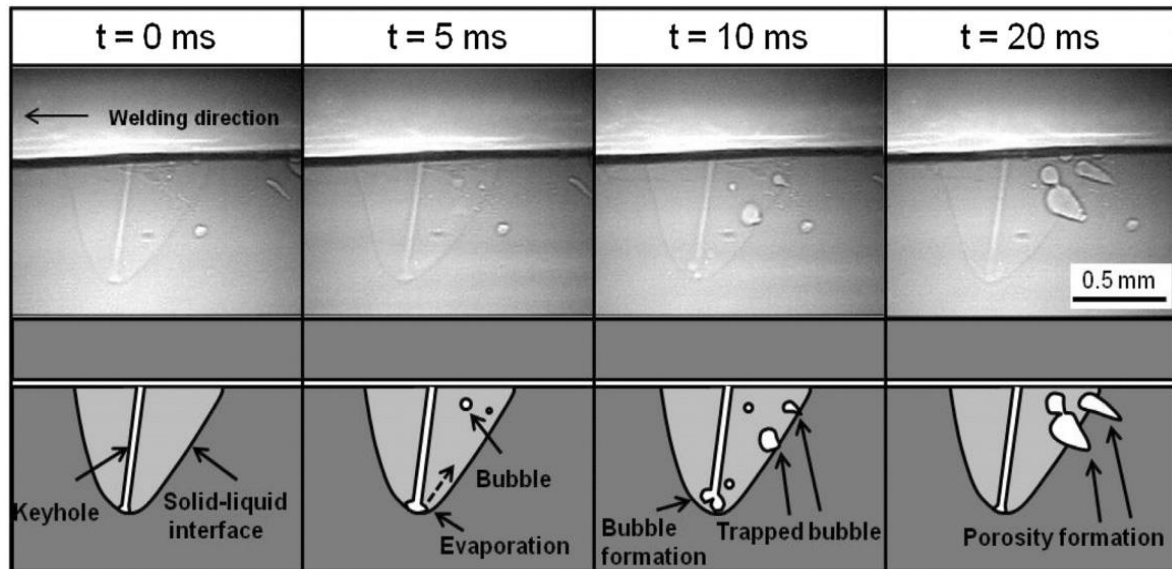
Images and schematics for keyhole and weld pool observation by X-ray phase contrast, for welding with fan usage [1].
